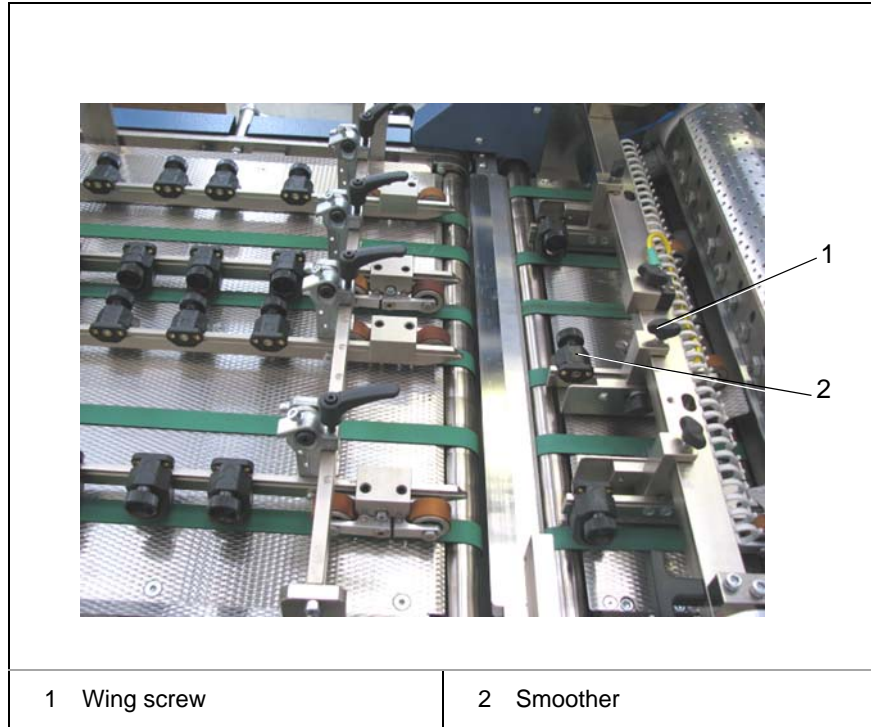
Adjust the smoothers after the cutting cylinder unit.
